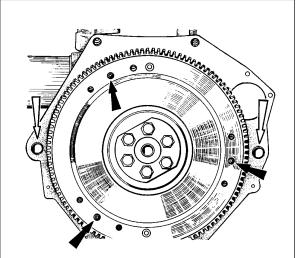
Clutch dowels (arrowed black) and clutch housing centering pins (arrowed white)
